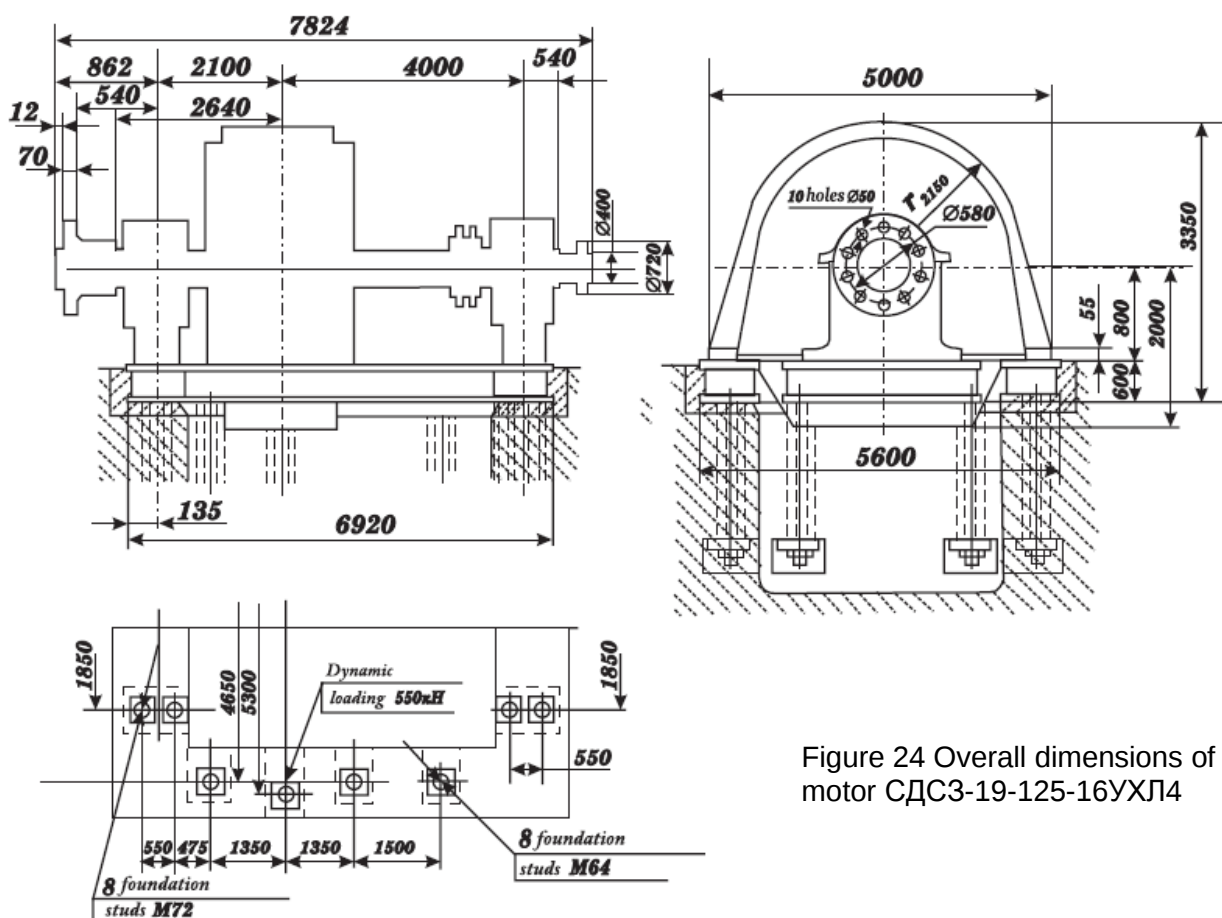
Overall dimensions of motor СДС3-19-125-16УХЛ4
